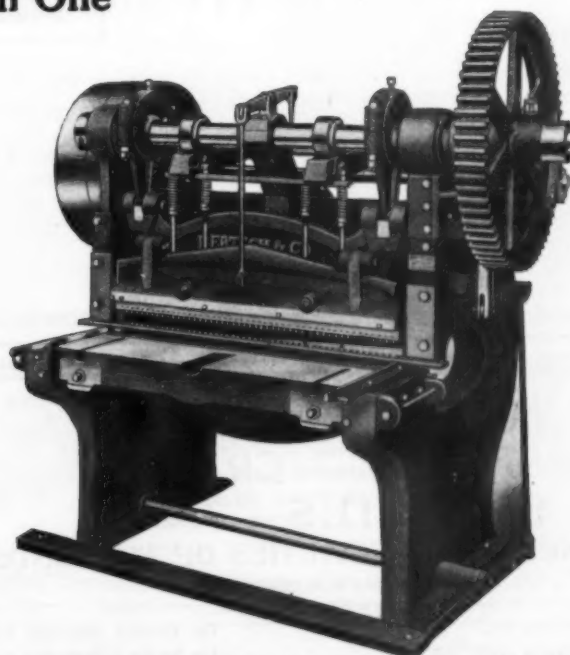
shows the punch-cross-head locked in position for punching and shearing in one operation.
